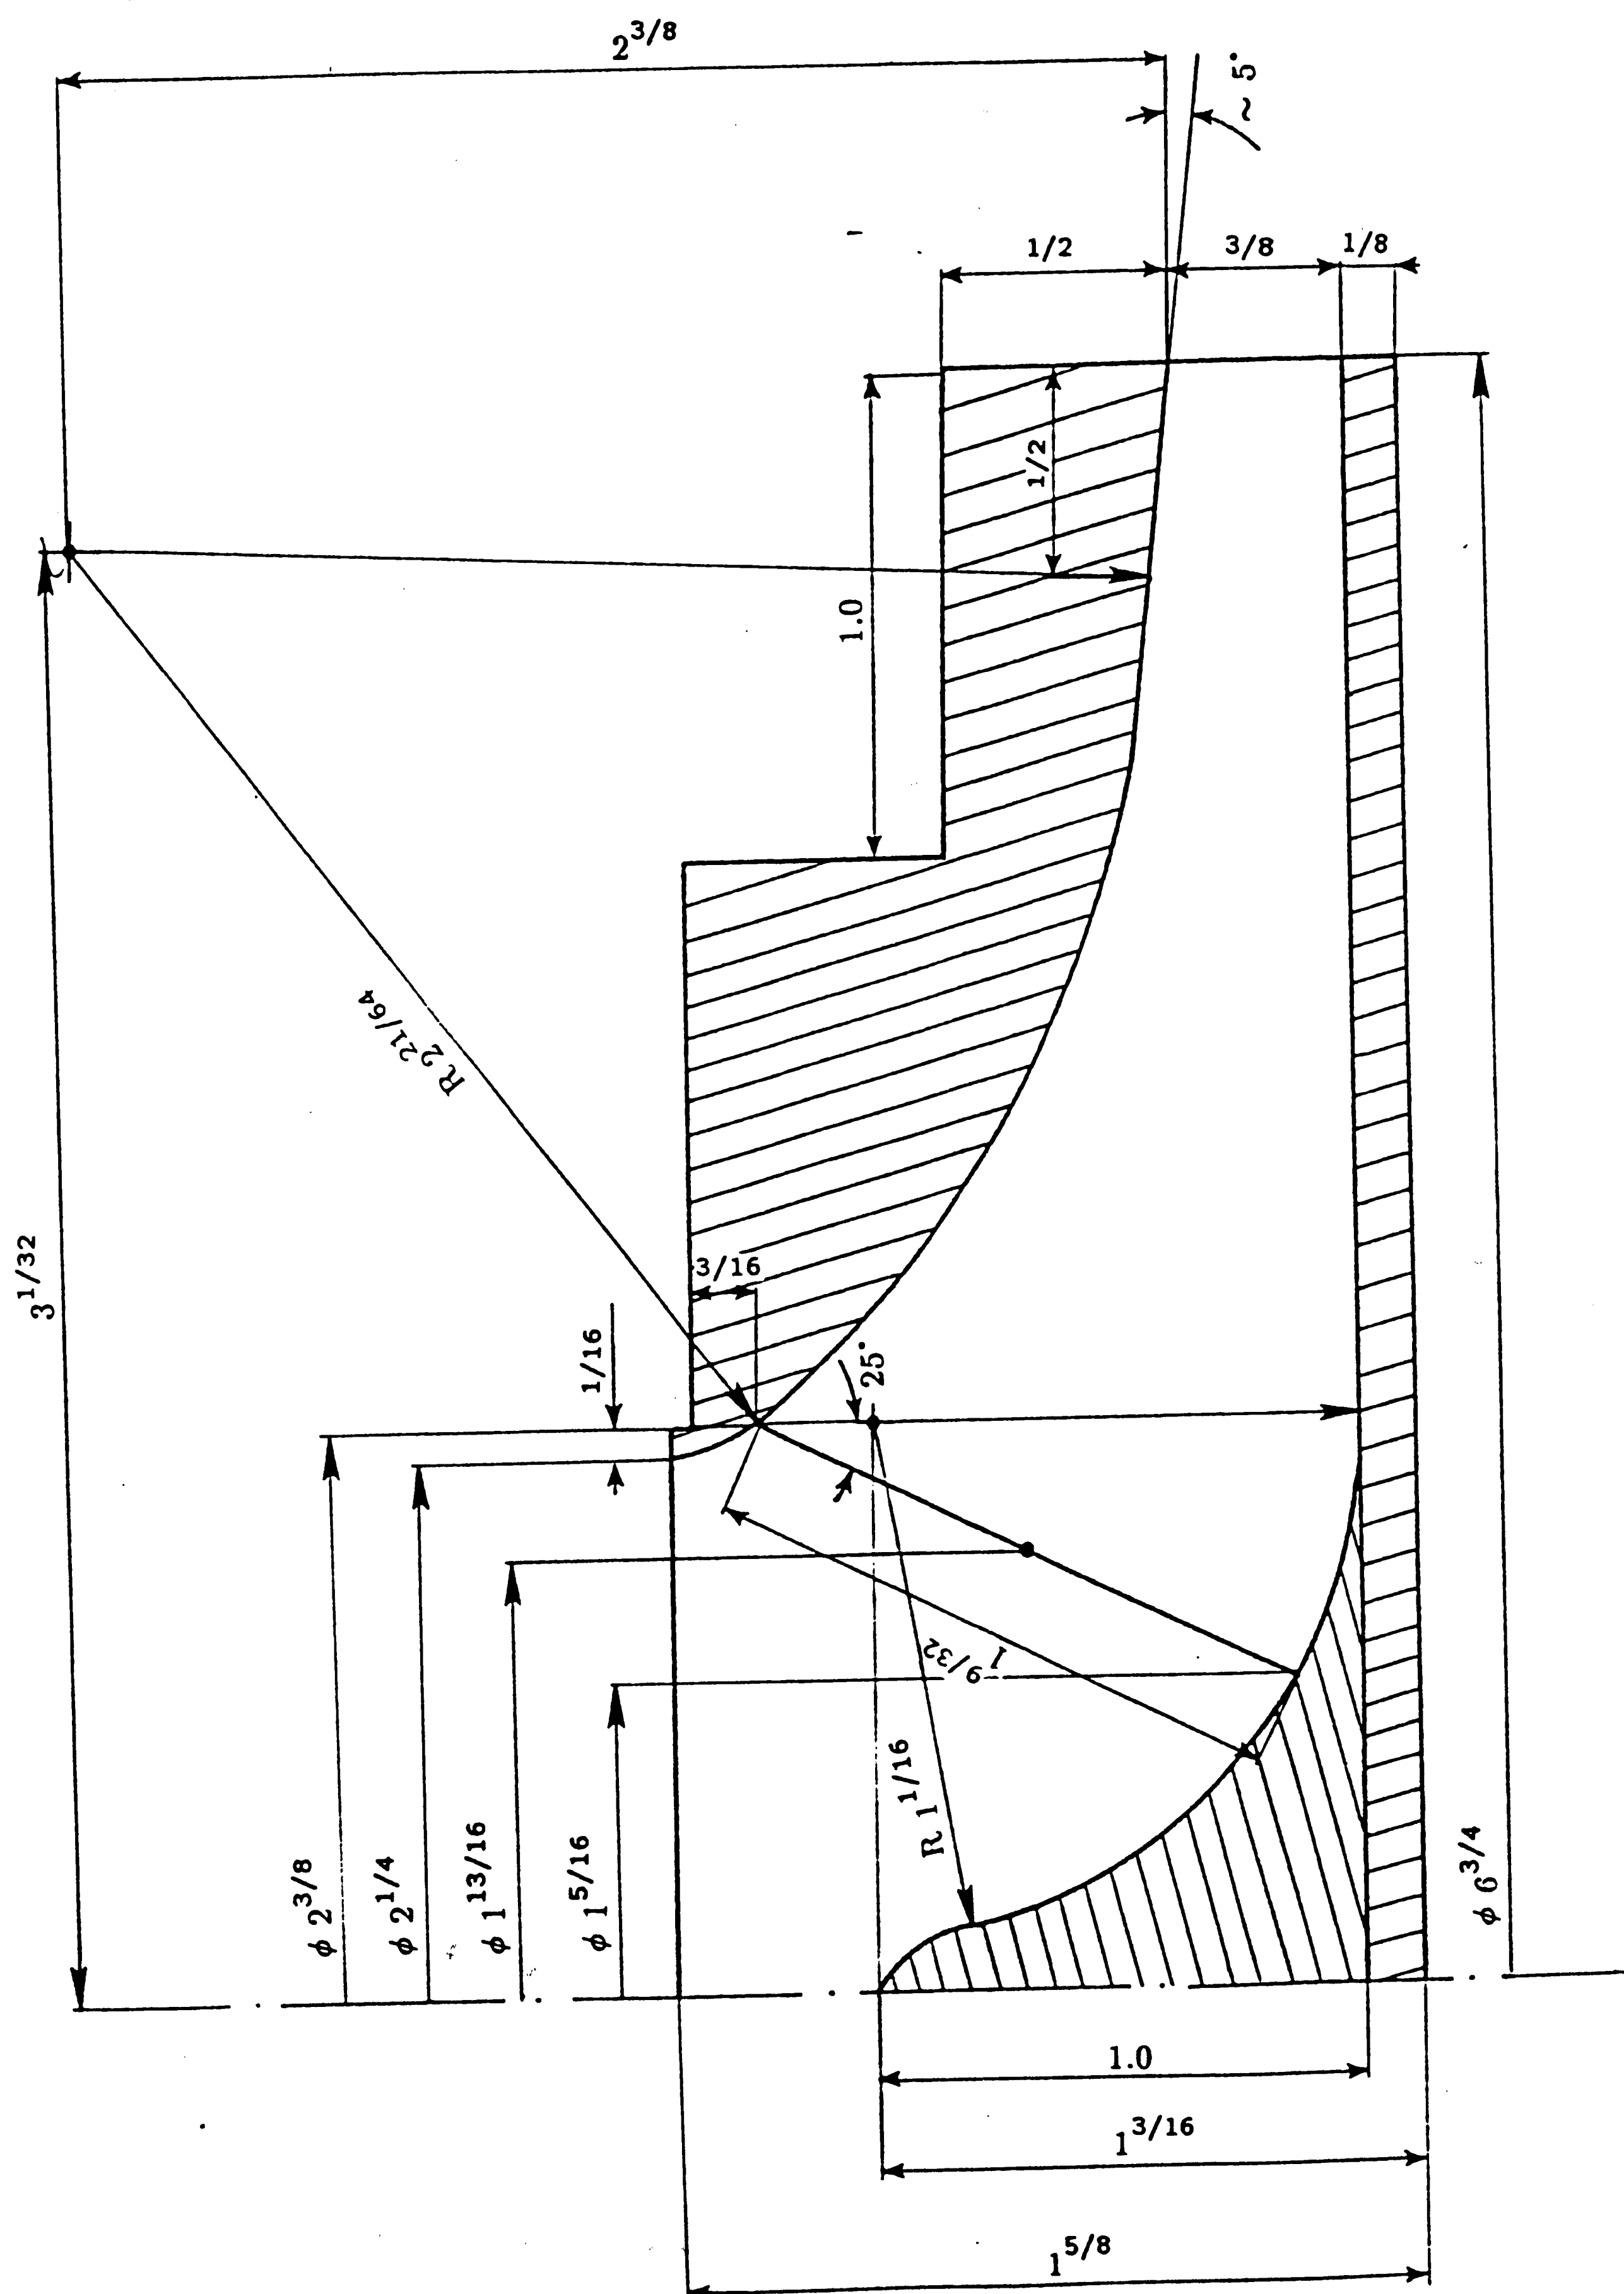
Detailed dimensions of the six blade impeller, side view.
